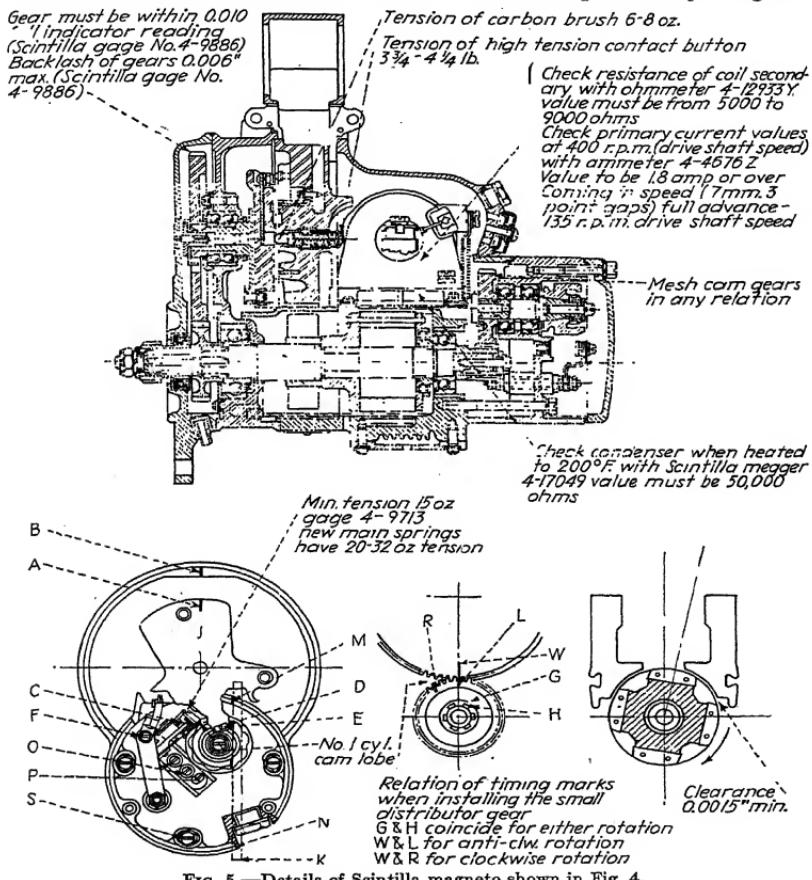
Details of Scintilla magneto shown in Fig. 4.
